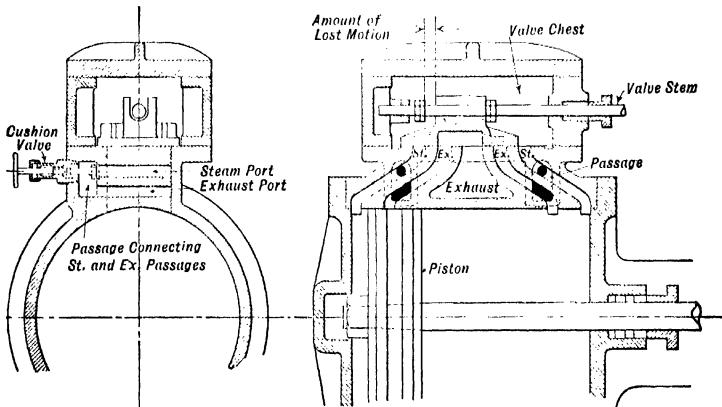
Steam Cylinder of Duplex Pump Showing Cushion Valves.
